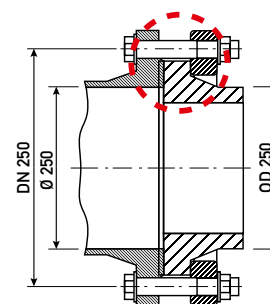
Flange connection with offset of inner pipe wall (red marking) and DN 250 valve
